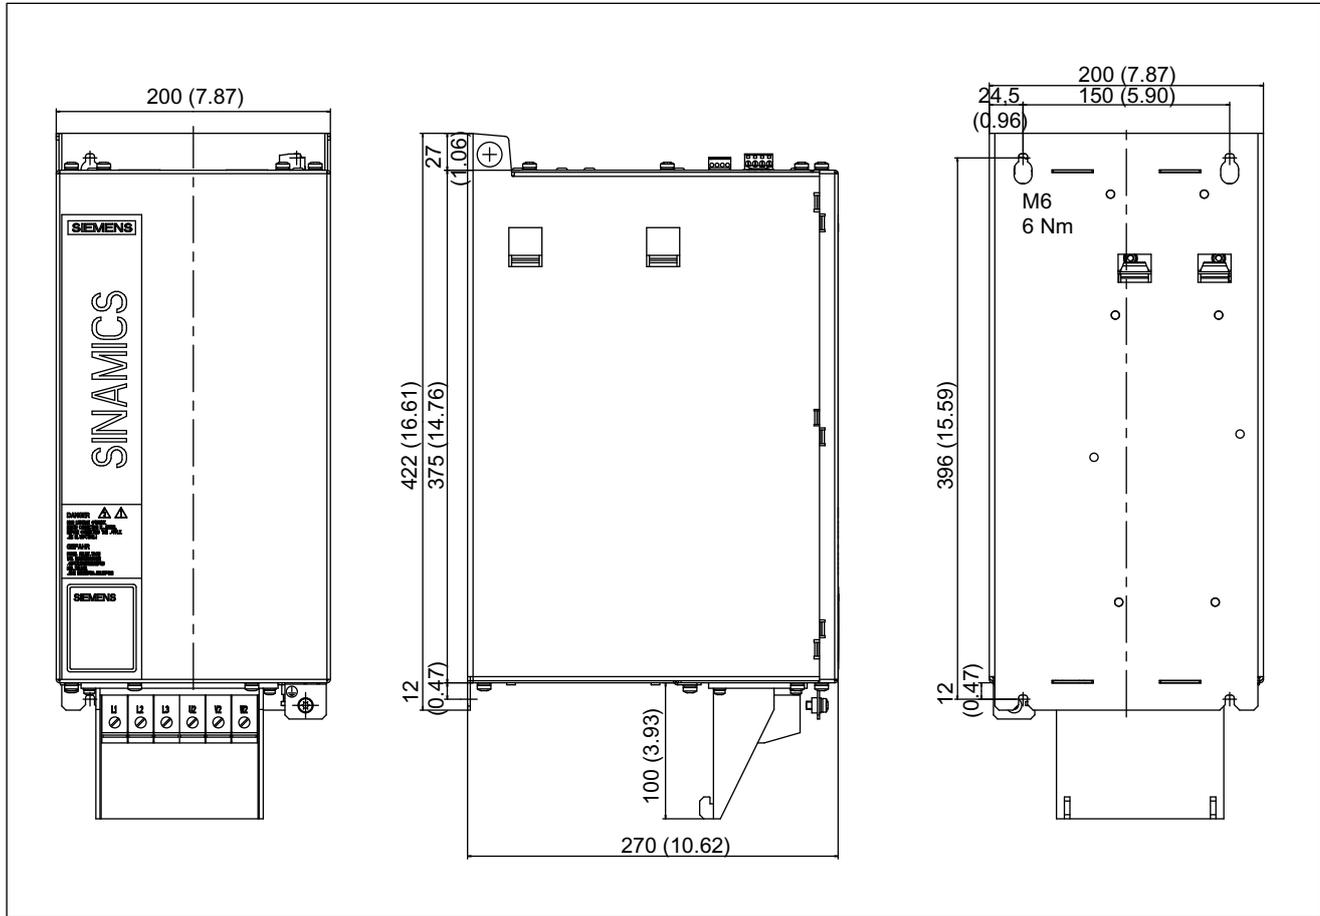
Dimension drawing: Active Interface Module 55 kW
